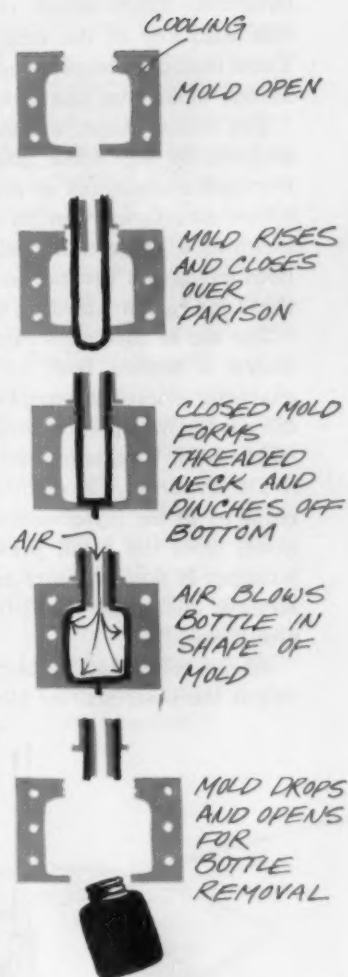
, right, shows extrusion-blowing technique, the most common type of blow-molding. Bottle in this illustration would be formed in an upright position, with neck shaped by the mold and a metal mandrel. Air enters through a core in mandrel to inflate tube. Inflation can also be done by an air-probe injected in tube at the side of the neck. Other blow-molding systems inflate from beneath, inverting the process. Multiple extruders feeding into a single manifold may also be employed.
